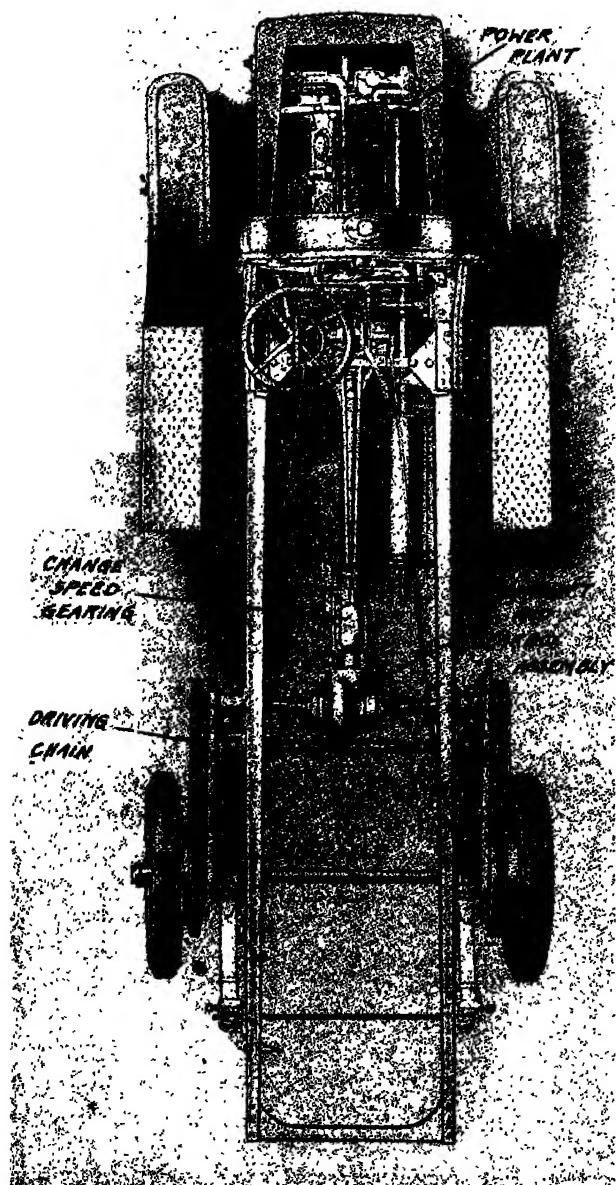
Plan View of Typical Chain Driven Motor Truck Chassis.
